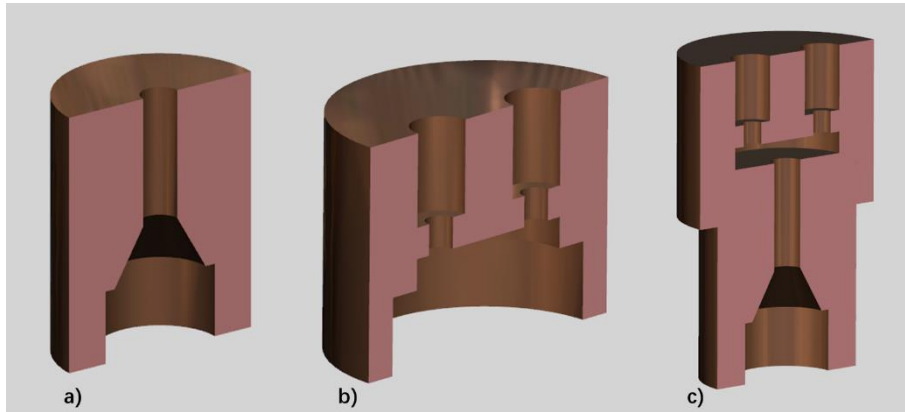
22 Section view of new distributor a) part1 b) part2 c) assembly
